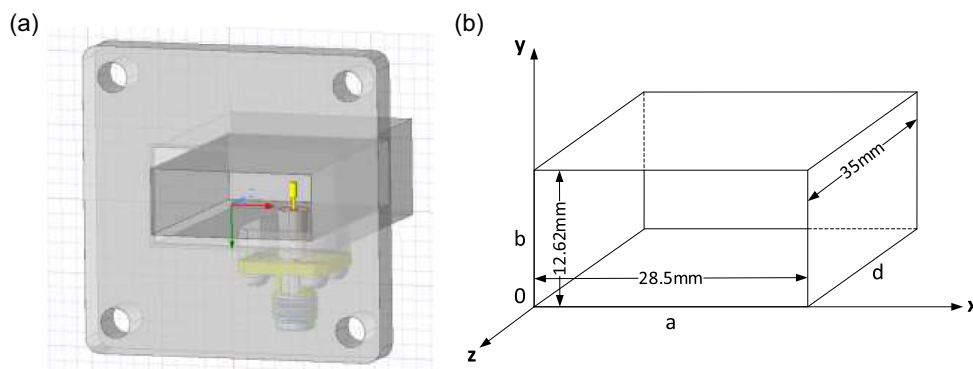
Waveguide adapter: a) 3D view and b) internal dimensions.
